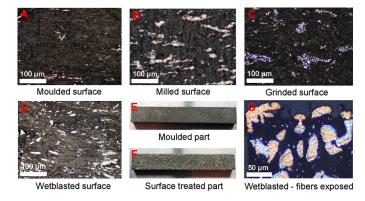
Surfaces of the moulded Schulatec TinCo 50 parts modified by different surface treatment techniques.
